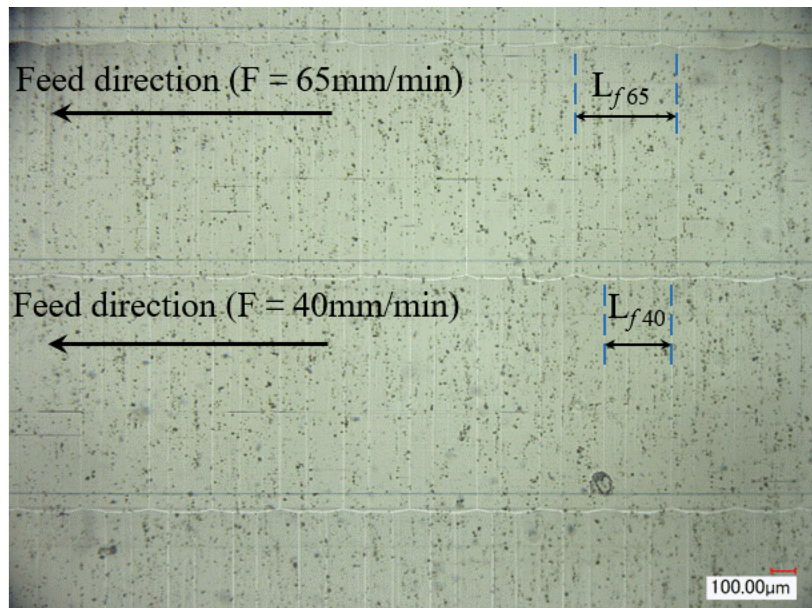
Picture of the machined surface (feed rate : 40 mm/min, 65 mm/min).
